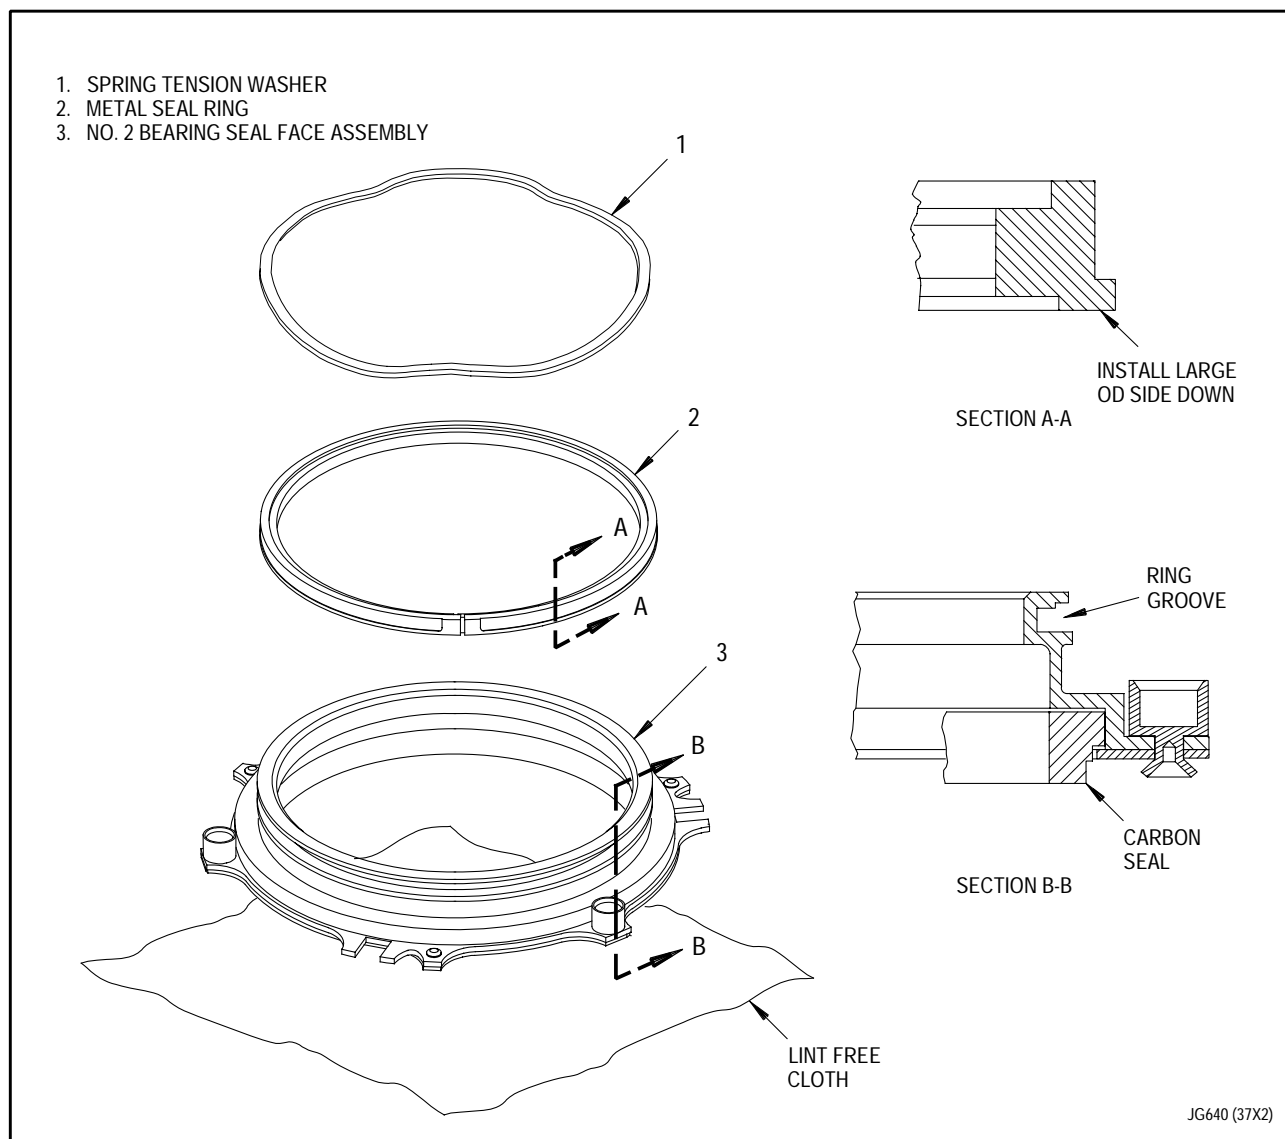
No. 2 Bearing Seal Face Assembly - Assembly
